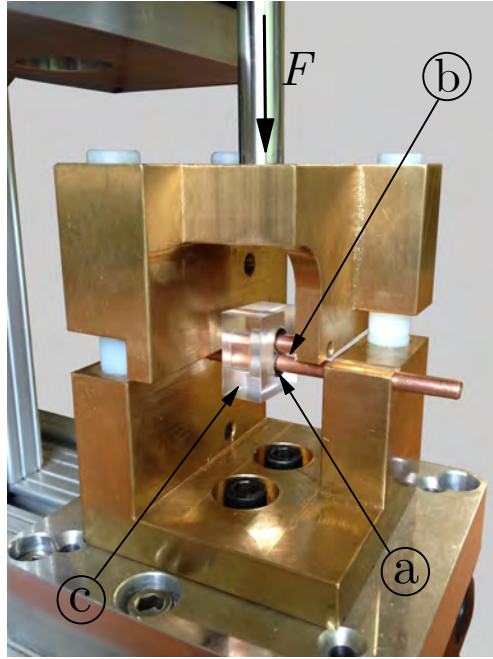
Tube welding set-up: (a) tubes; (b) cylindrical copper electrodes; and (c) Plexiglas template.
